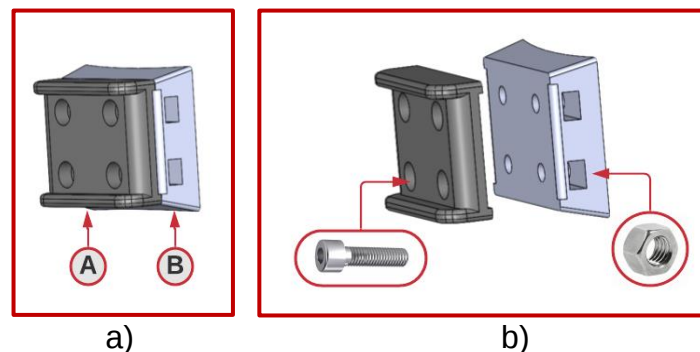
Double Figure of the Component used in the Elastic Band System: a) Constitution of the component (Component A and Component B); b) Hexagon socket head cap screws and nuts used to fix.
